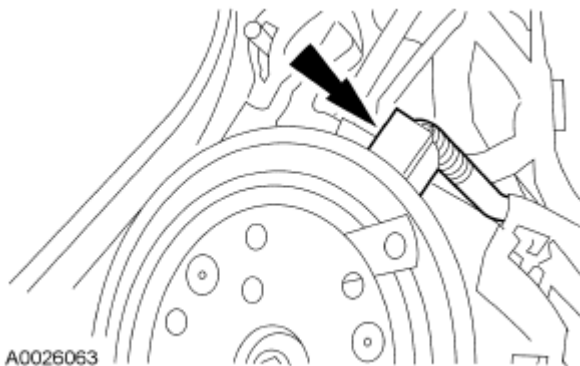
Locating A/C Clutch Field Coil Electrical Connector
